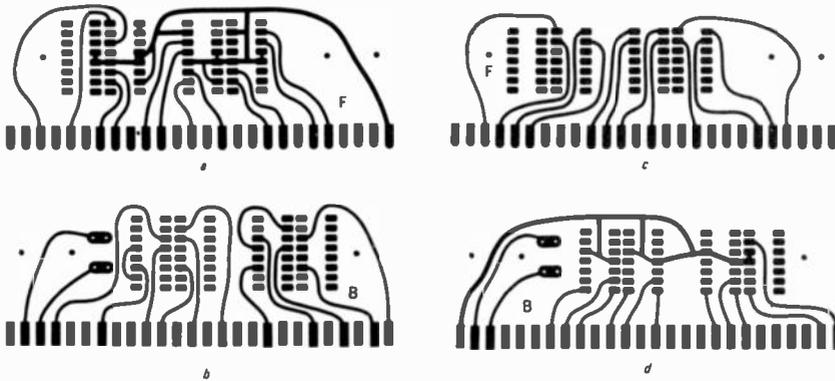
DISPLAY BOARD foil-patterns shown half-size. a—front of incandescent display board; b—rear of same board; c—front of LED board; d—back of the LED board.
